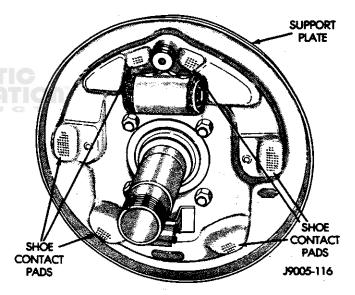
Support Plate Brakeshoe Contact Pads BRAKE SHOE INSTALLATION
